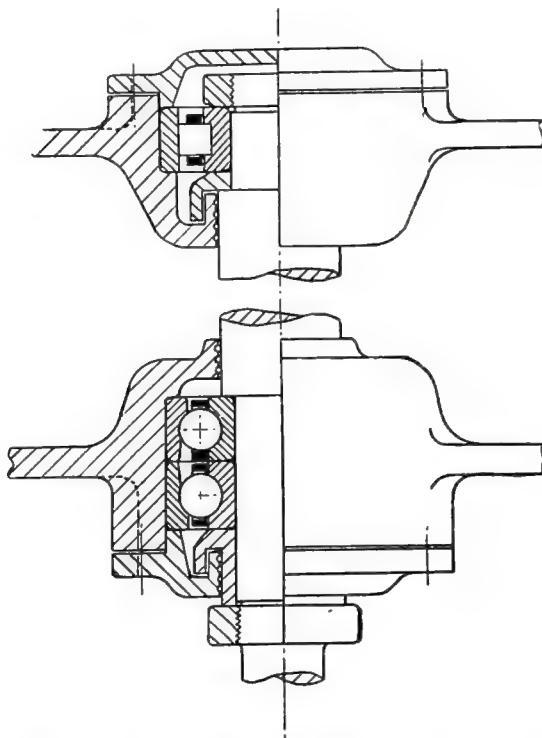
Ball and Roller Bearings to Vertical Motor.
